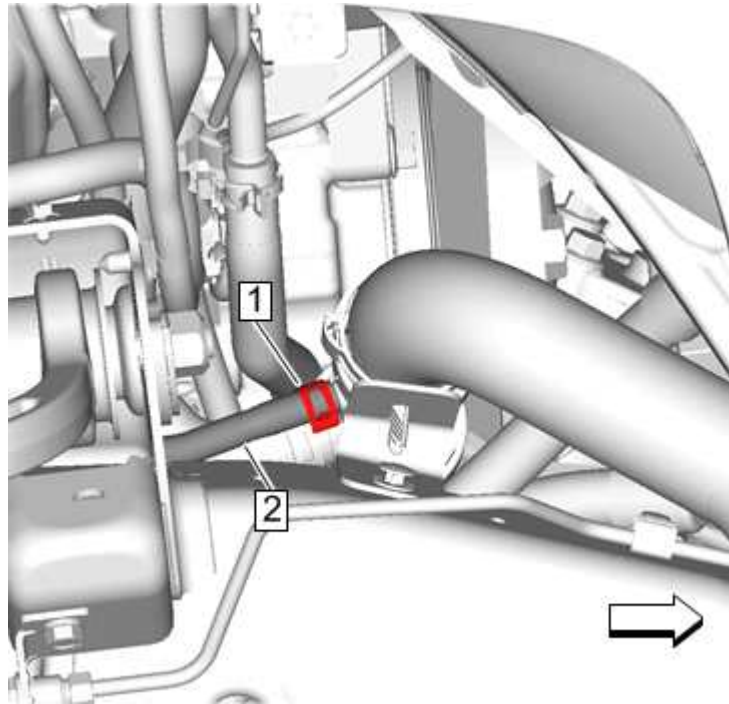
Emission Reduction Fluid Injector Outlet Hose And Radiator Outlet Hose
